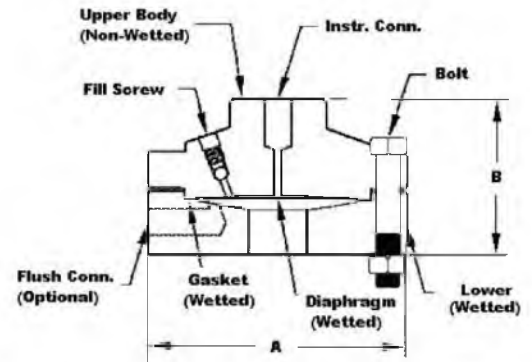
Seal Dimensions (Threaded Process Connection Seals)
